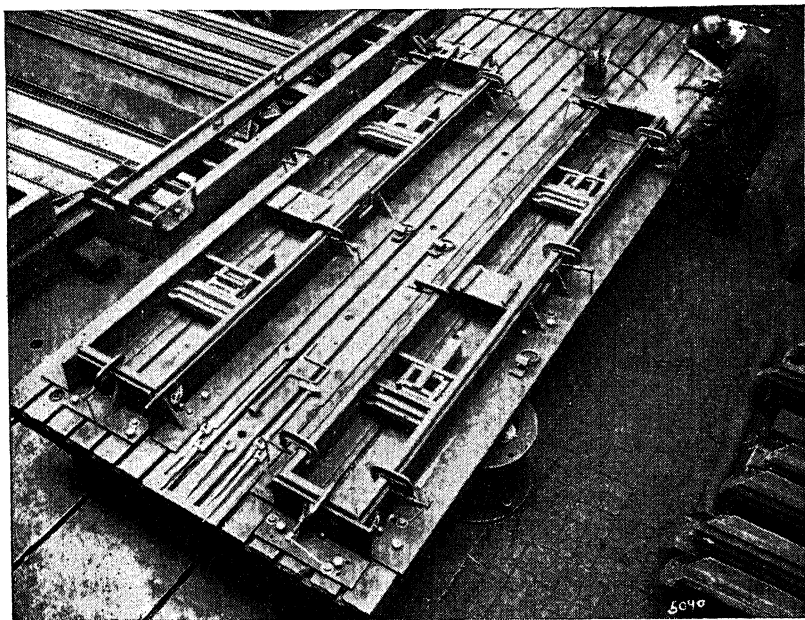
Fixture for welding bulb angle frame for coke oven self sealing doors maintains proper alignment of parts.
